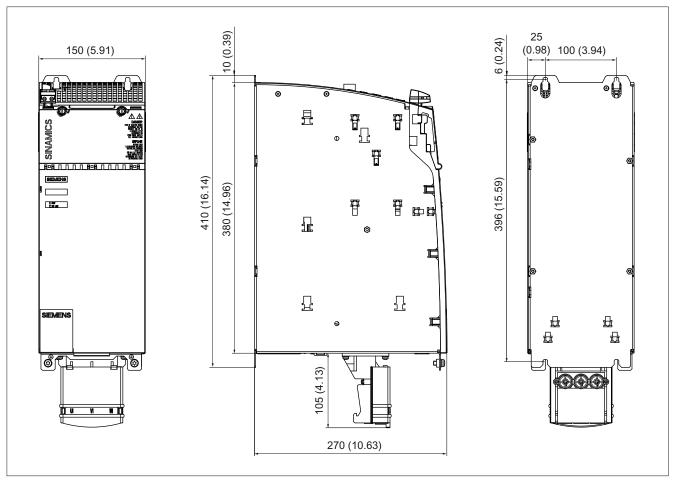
Dimension drawing of 36 kW Smart Line Module with internal air cooling, all dimensions in mm and (inches)
